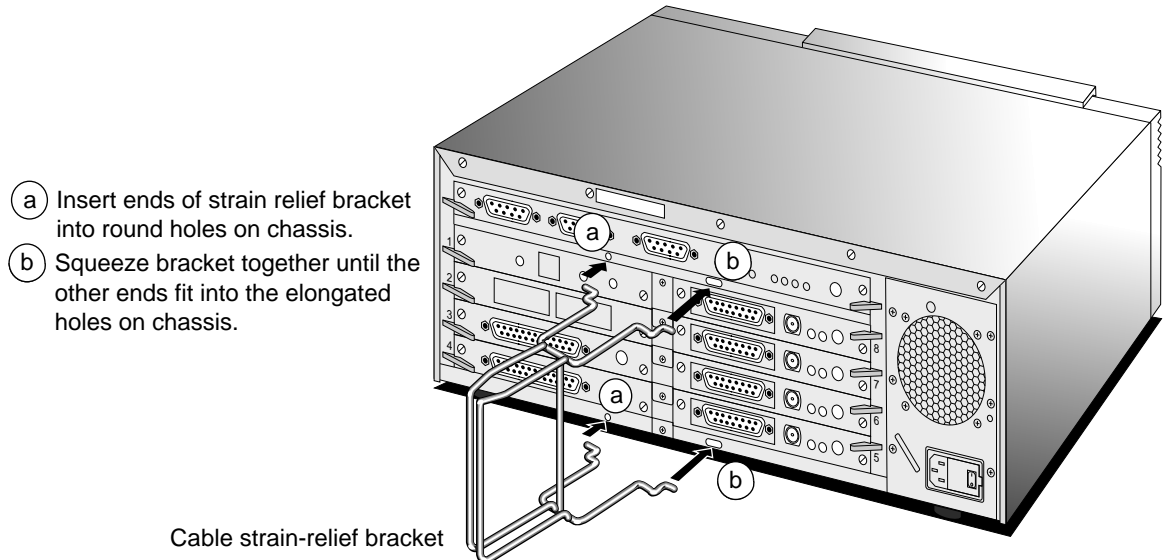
Installing the Cable Strain-Relief Bracket on the 8-Slot Chassis
